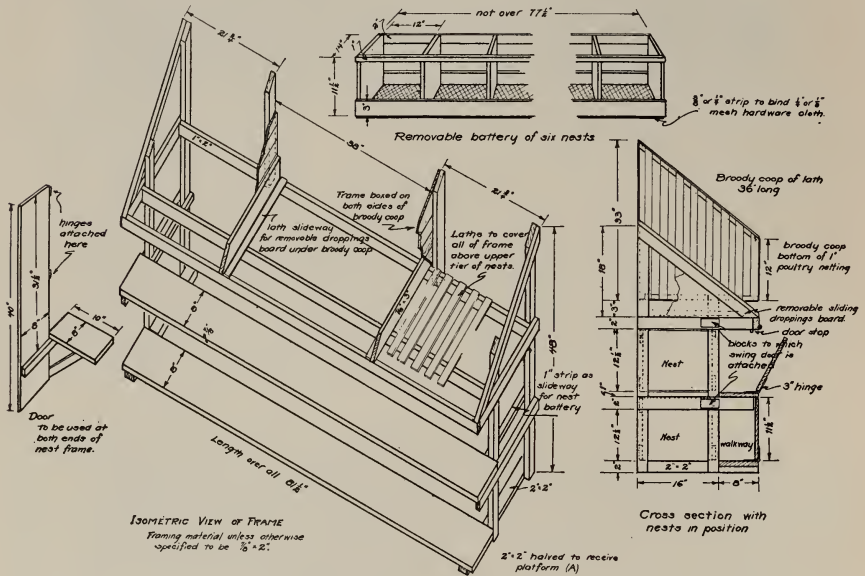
Working plans for the construction of nest and broody coop unit. (From Cir. 268.)
